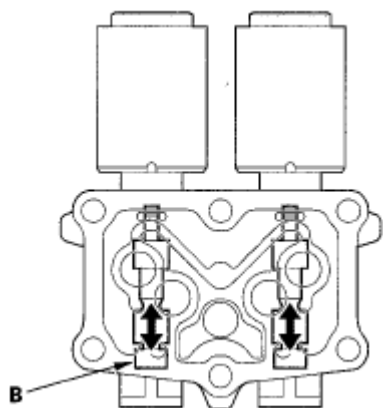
Checking A/T Clutch Pressure Control Solenoid Valve B
